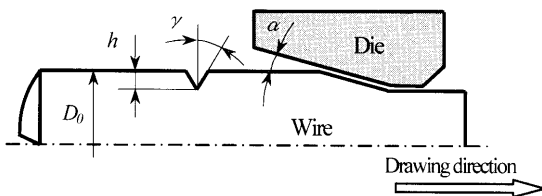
Drawing model of a wire containing a V shape transversal crack.
